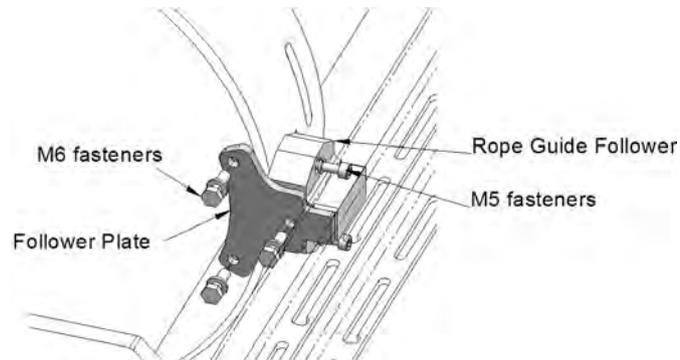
Fitting Rope Guide Plate – Galvanising/Aggressive Environments
